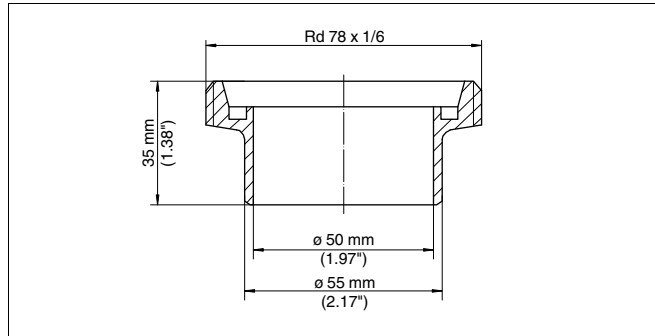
Dimensions welded socket, bolting DN 50 according to DIN 11851
